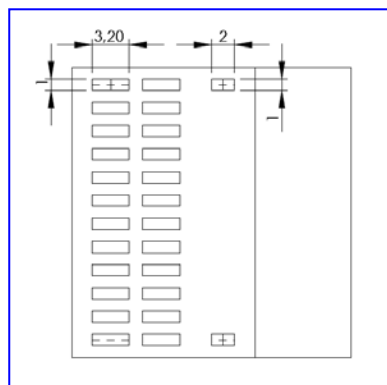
Solder paste for the DevCom 06 ZigBee Module
